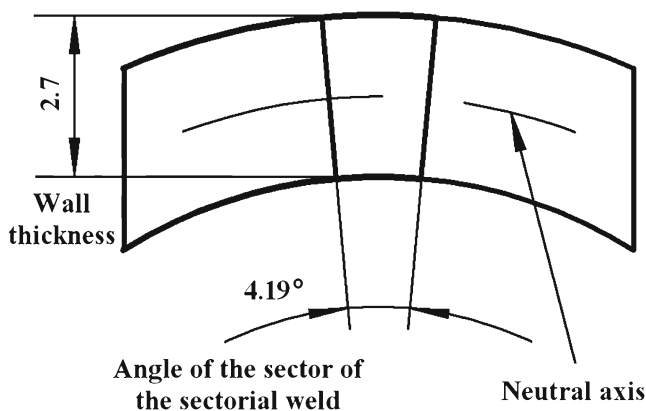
Schematic of the welded tube with a sectorial weld profile
